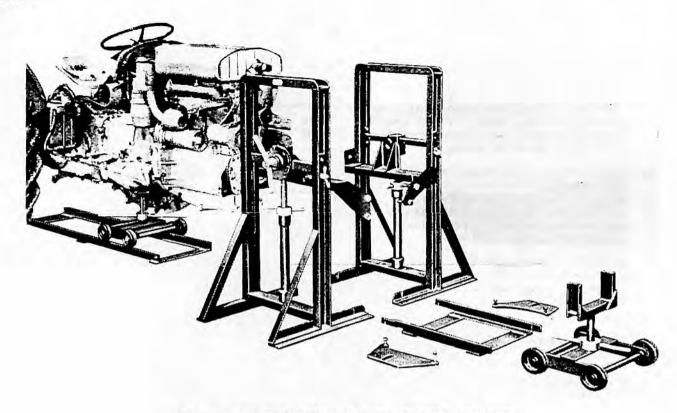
MOUNTING ENGINE ON STAND—FIRST OPERATION
